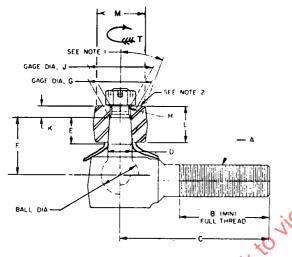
TYPICAL BALL STUD SOCKET ASSEMBLY WITH EXTERNAL THREADED STEM
